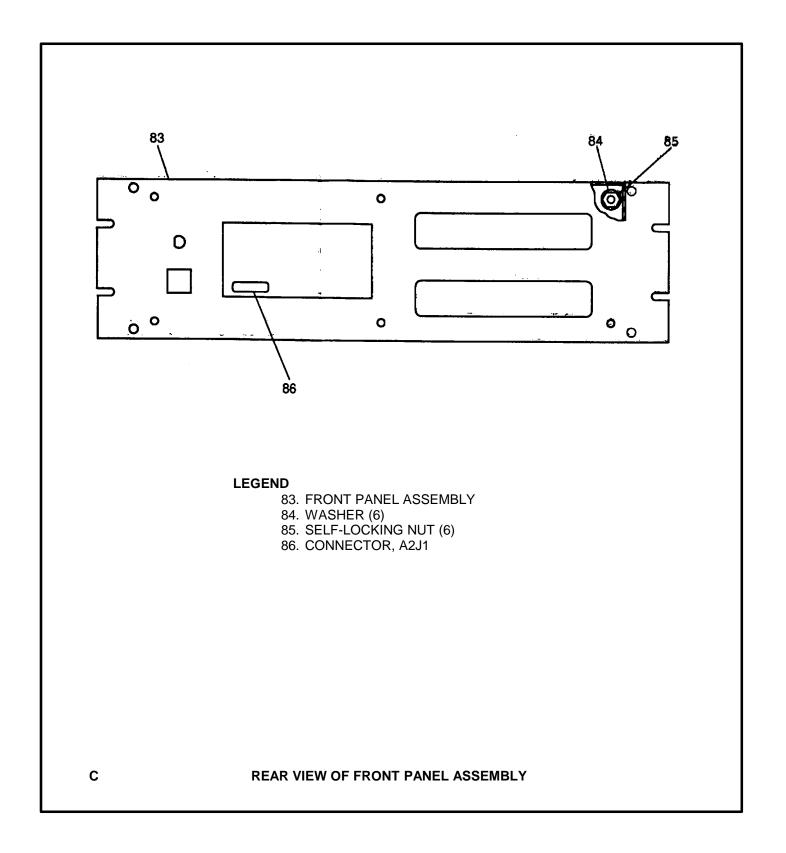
TS-4295/G Exploded View (Sheet 2 of 3)
